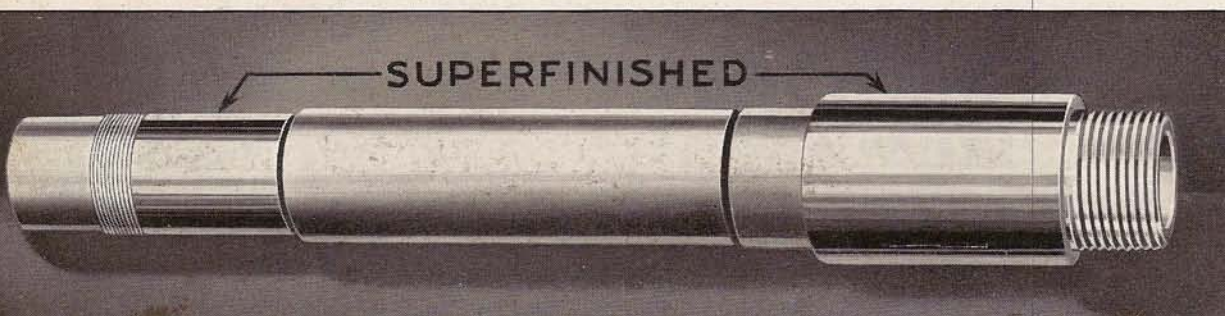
Heat-treated Alloy Steel Spindle with Journal Bearing Surfaces Carburized, Hardened, Ground, and Superfinished.
